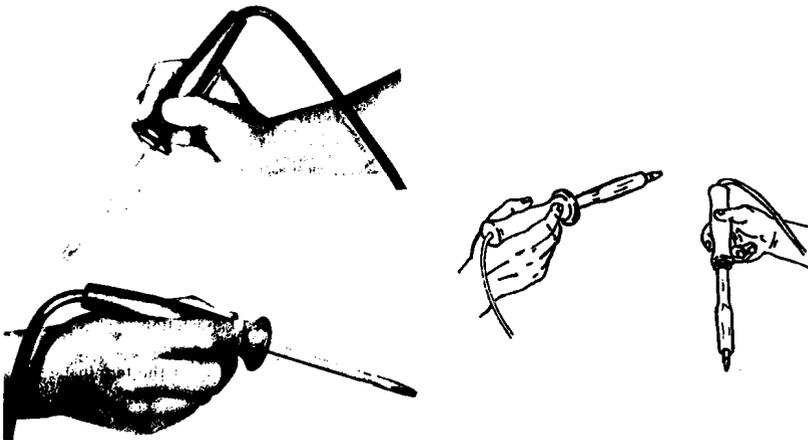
Pencil Grip Method of Holding Soldering Iron
